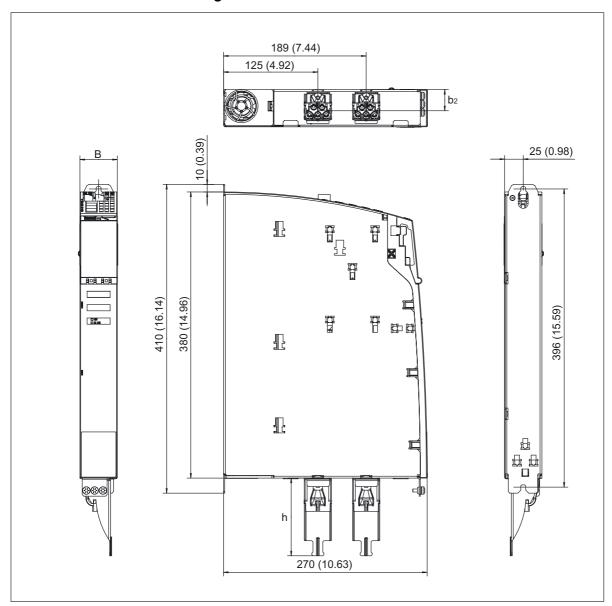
Dimension drawing of Motor Module with internal air cooling 3 A to 18 A and 2 x 3 A to 2 x 9 A
